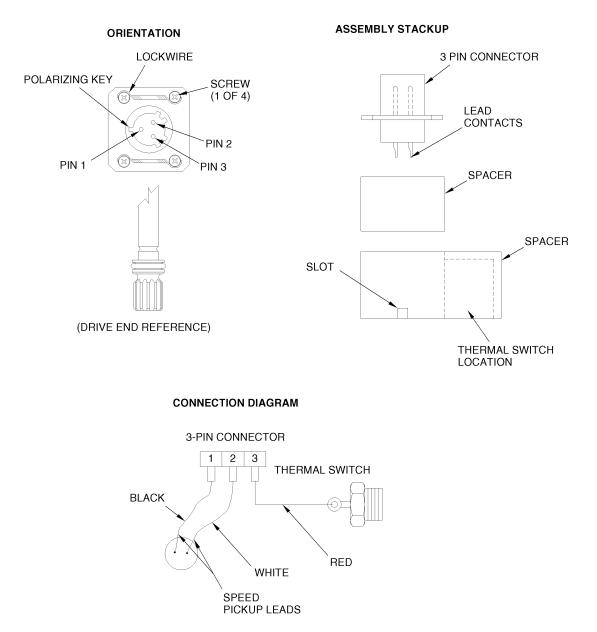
Assembling the 3-Pin Connector and Spacers
